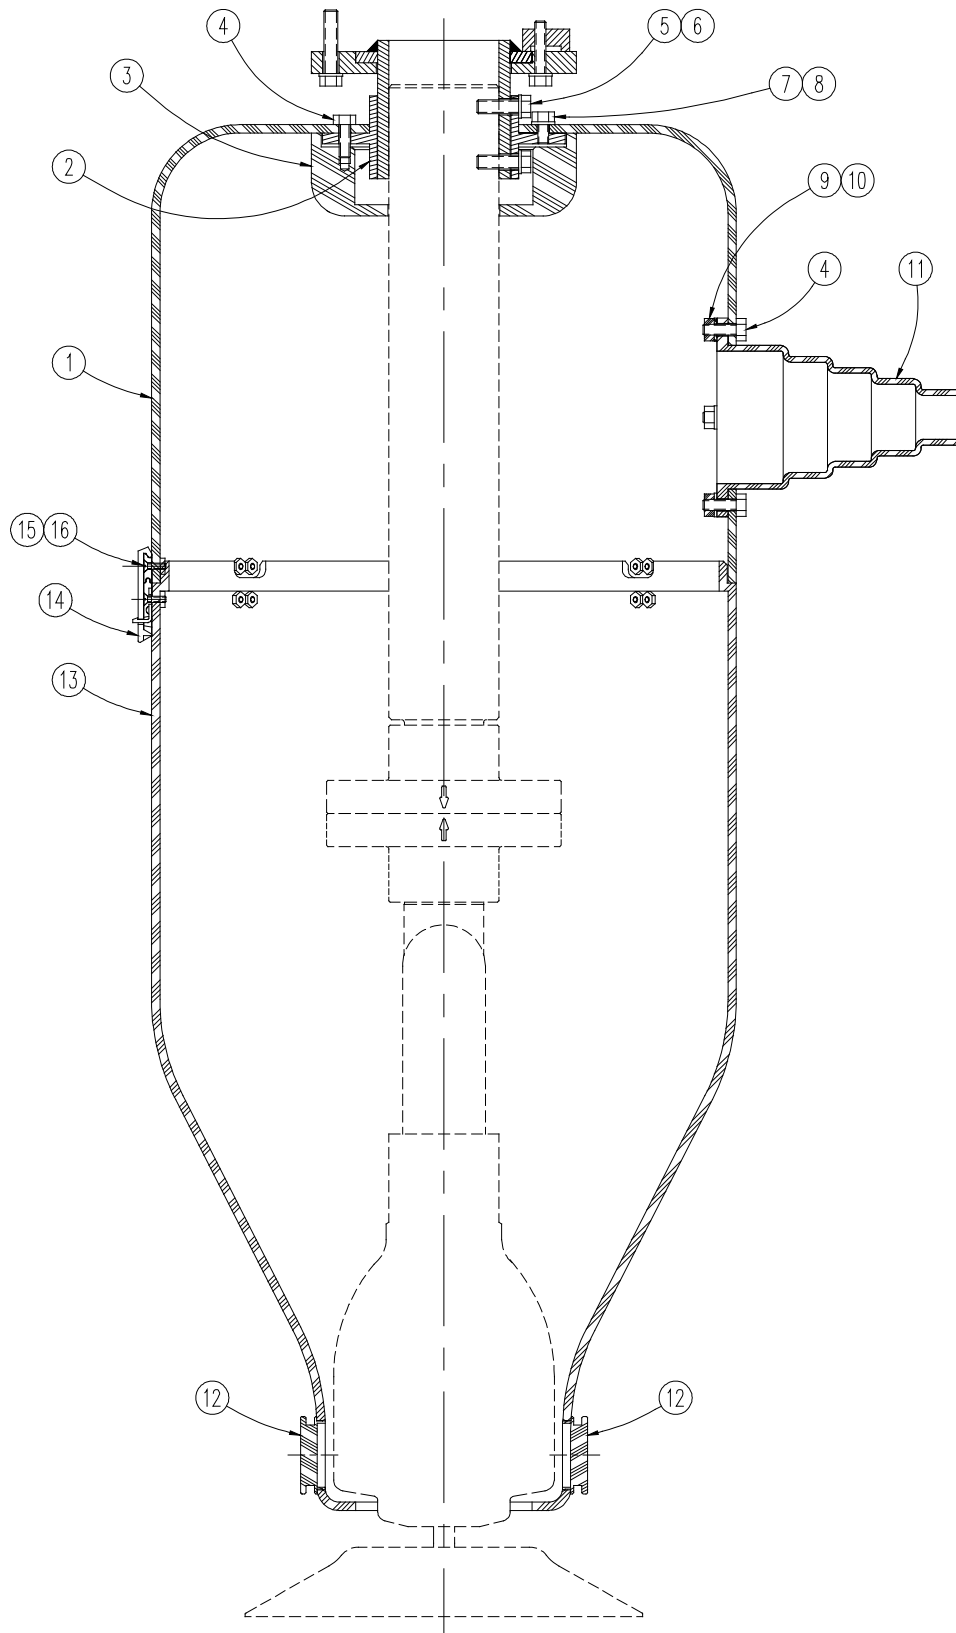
78189 Turbodisk 2 Quick Release Fairing Assembly
